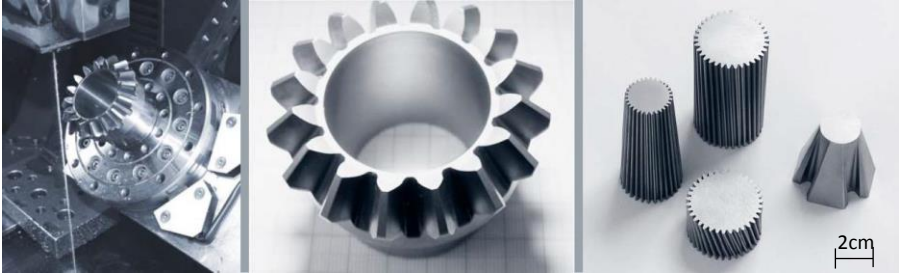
5-axis wire EDM of conical parts [34].
